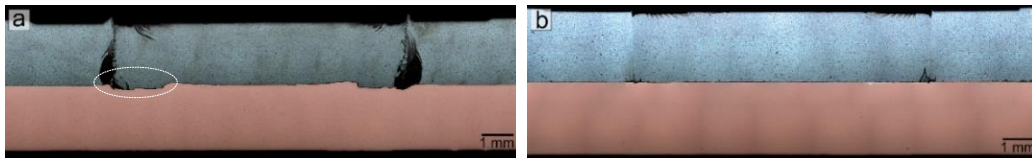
As-etched macrographs obtained with a (a) threaded and (b) non-threaded tool. White dashed circle in (a) indicates the deformed metallic volume under the interface. Welding condition: RS = 1200 rpm, PD = 2 mm, DT = 1 s, CF = 17.48 kN, PT = 2 s, RT = 1 s.
